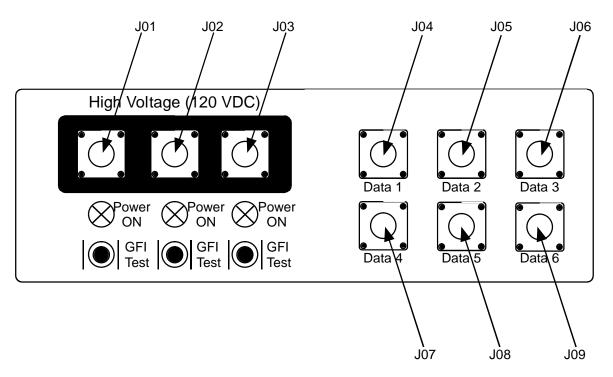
SUP PANEL LAYOUT
